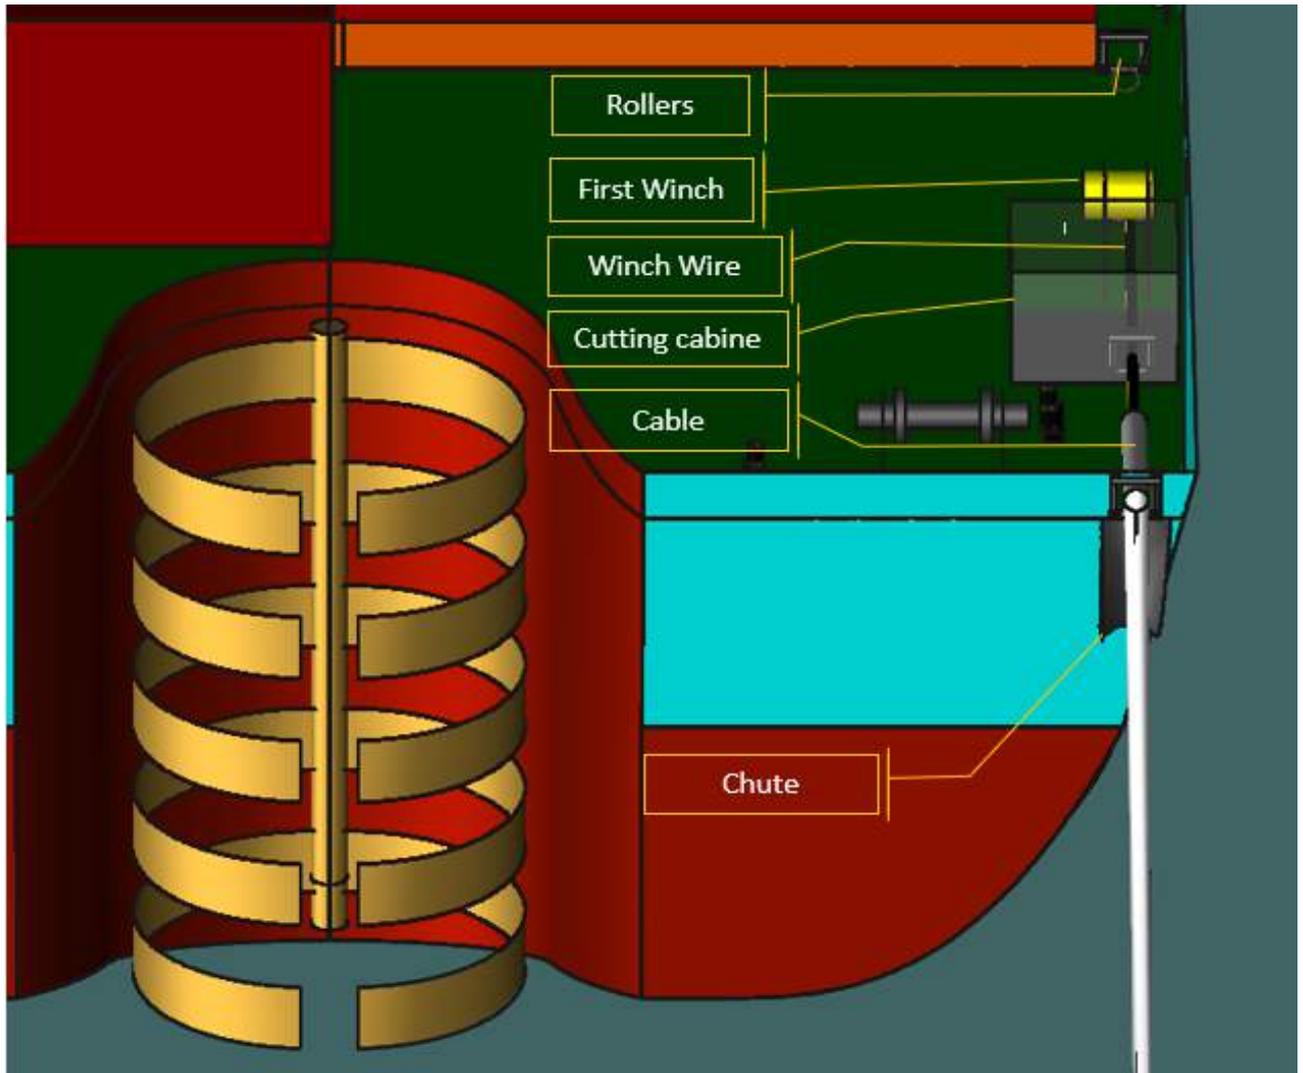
Chute, Hydraulic Cable Clamp and 1st Winch
